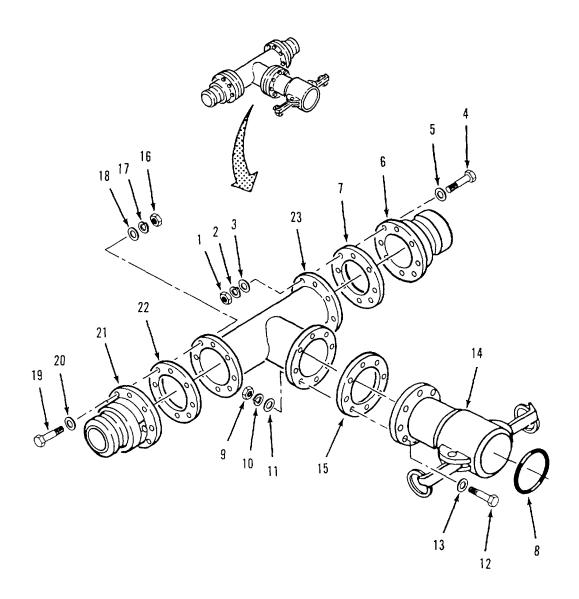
Tee Assembly (9112-Y4) Disassembly
